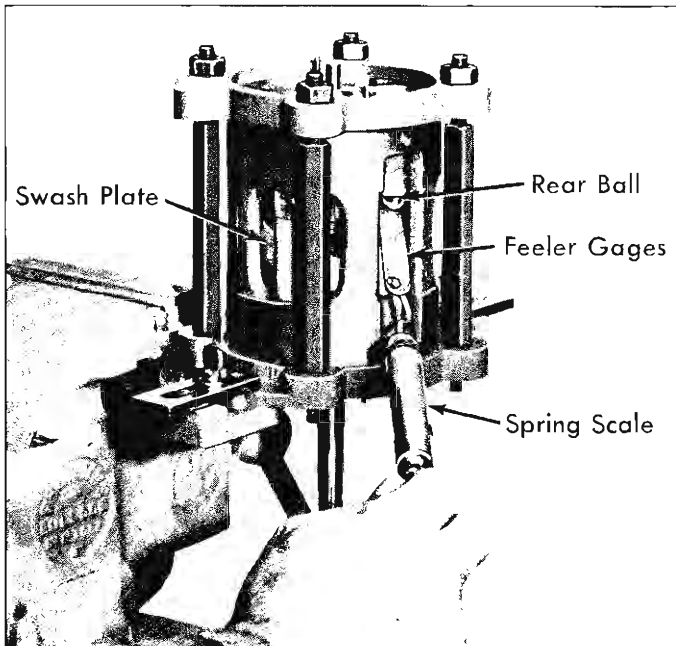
Checking Clearance between Rear Ball and Swash Plate
